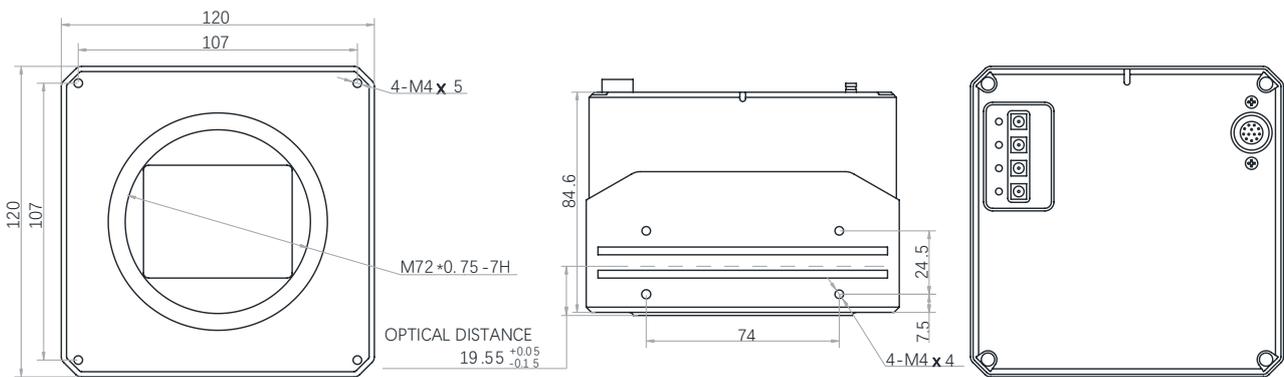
120 * 120 * 84.6 mm mechanical dimensions of the CoaXPress camera with M72, which adopts M4 specification screws.
